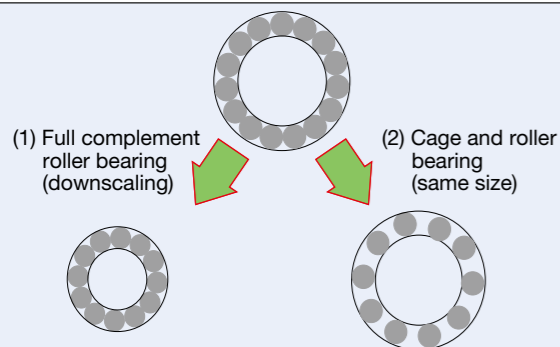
Effect of reducing torque by downscaling the bearing or using a cage and rollers
